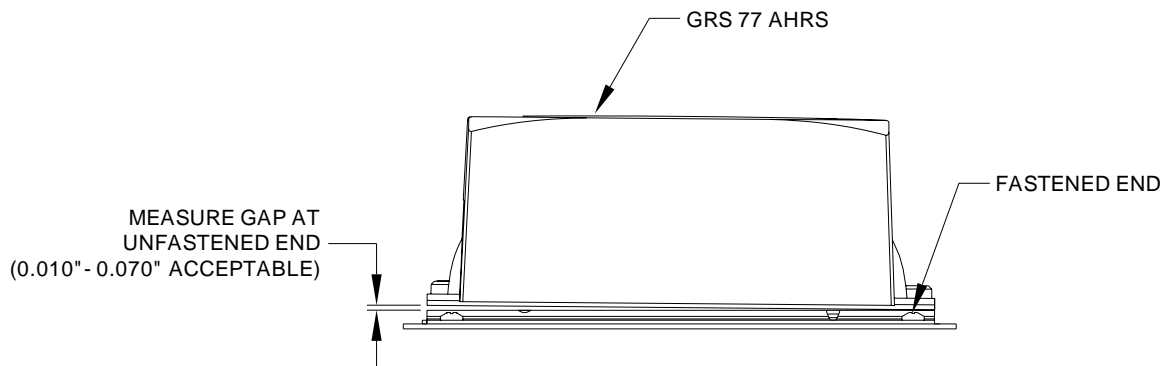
Measuring GRS 77 to Mount Rack with Feeler Gauge
